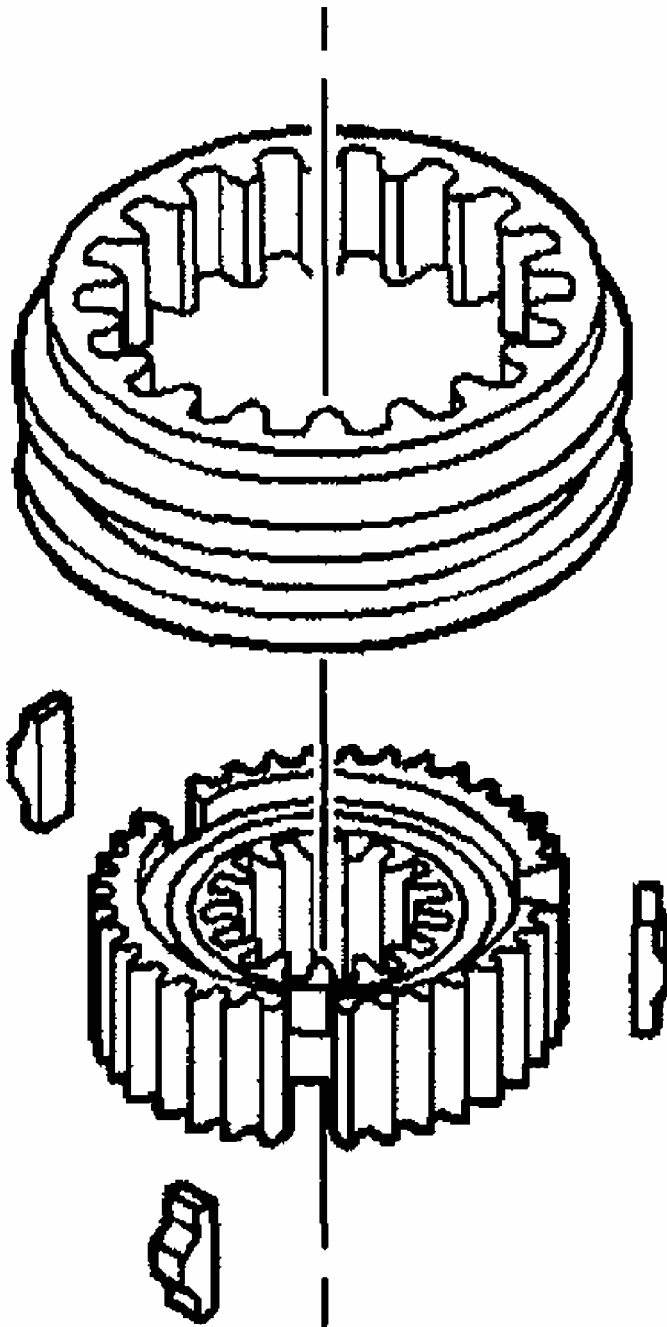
Checking Synchronizer Assembly Scribe Marks For Correct Positions
